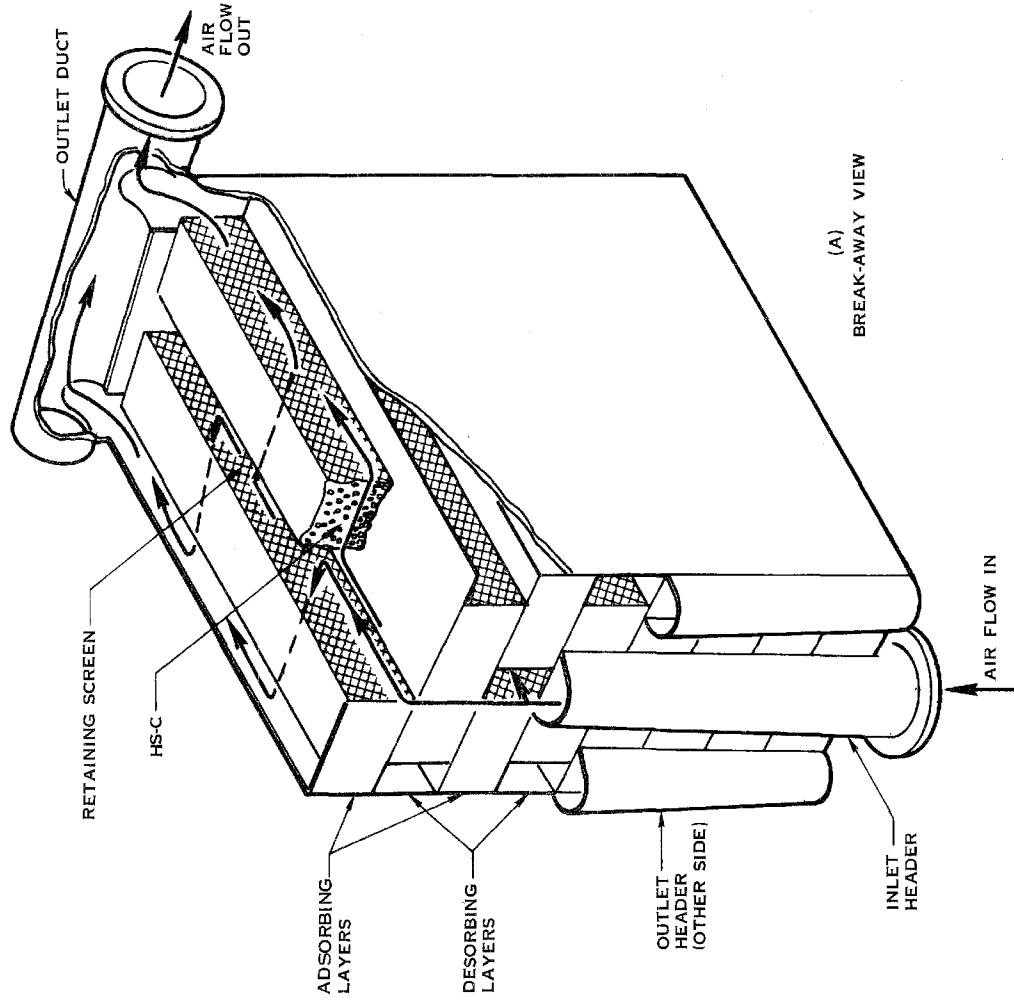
illustrates how the concept would be incorporated into a canister. The HS-C canister core consists of alternating layer separated by parting sheets. One layer of HS-C is adsorbing while the two adjacent layers are desorbing. External headers connect the alternate layers to a common duct so that there will be four air passage flanges.
